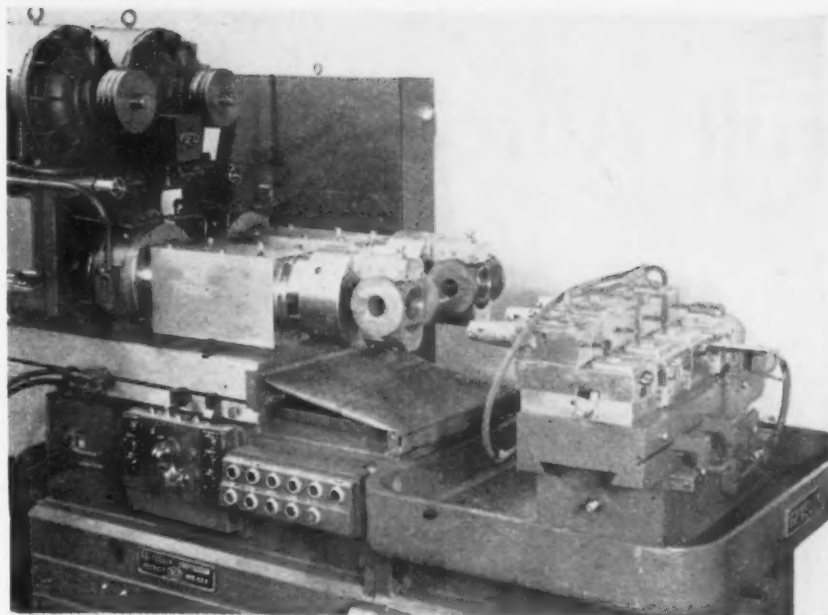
Special arrangement for precision boring taper holes in plug cock bodies. Centerline of the work holding spindles is set at an angle to the line of traverse of the table to produce the taper, and production is 21 pieces per hr.
